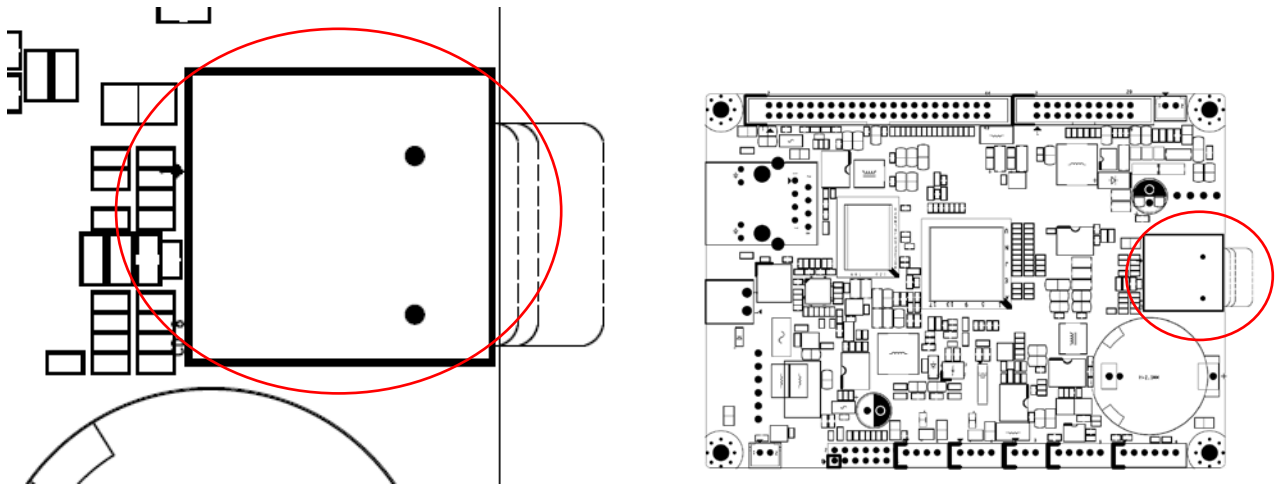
μ SD Flash Card Socket (Bottom Side)
